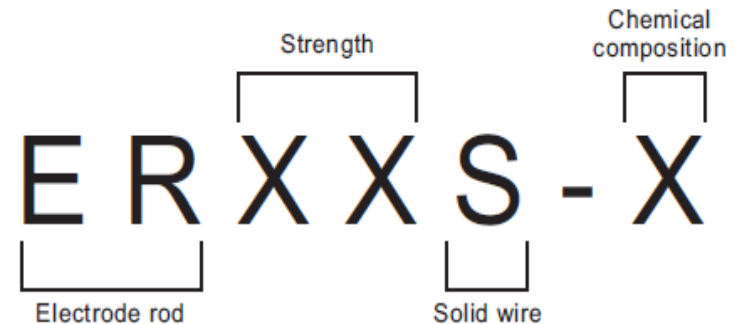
GMAW/GTAW/PAW Welding Electrode Identification System
